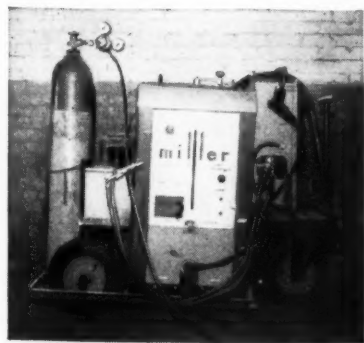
Portable spot-welding unit which can be moved from job to job by one man.
